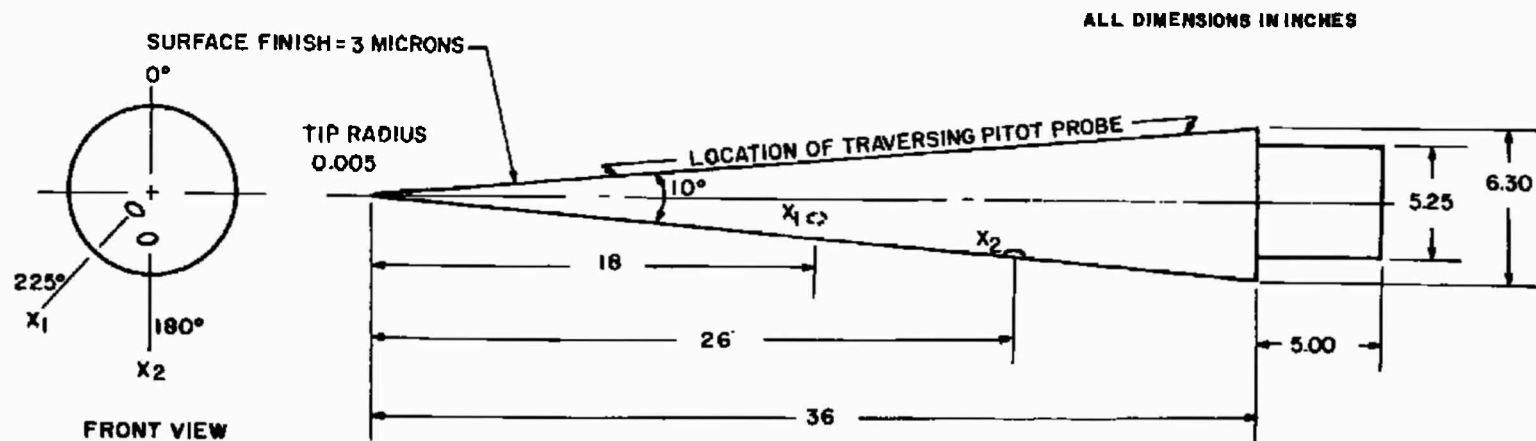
Details of 10-deg Transition Cone and Mounting Arrangement for Pressure Transducers
